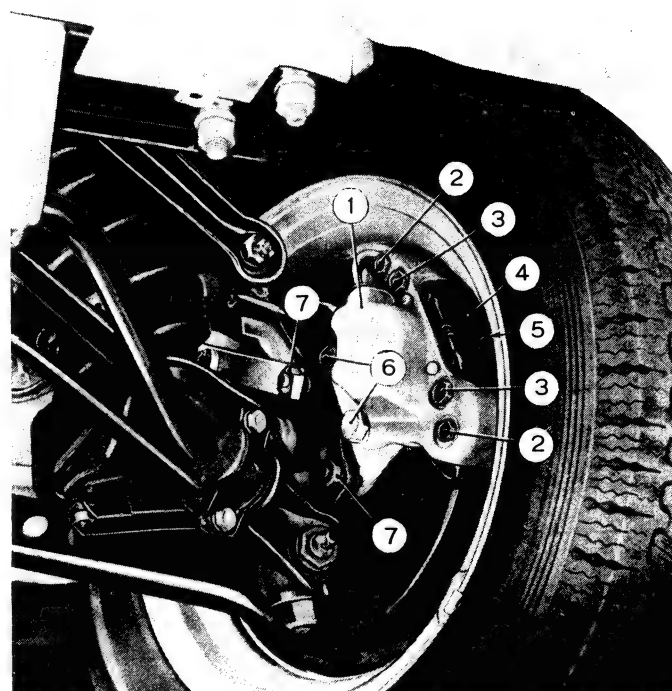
Left front wheel brake caliper - 1500 Cabriolet.
